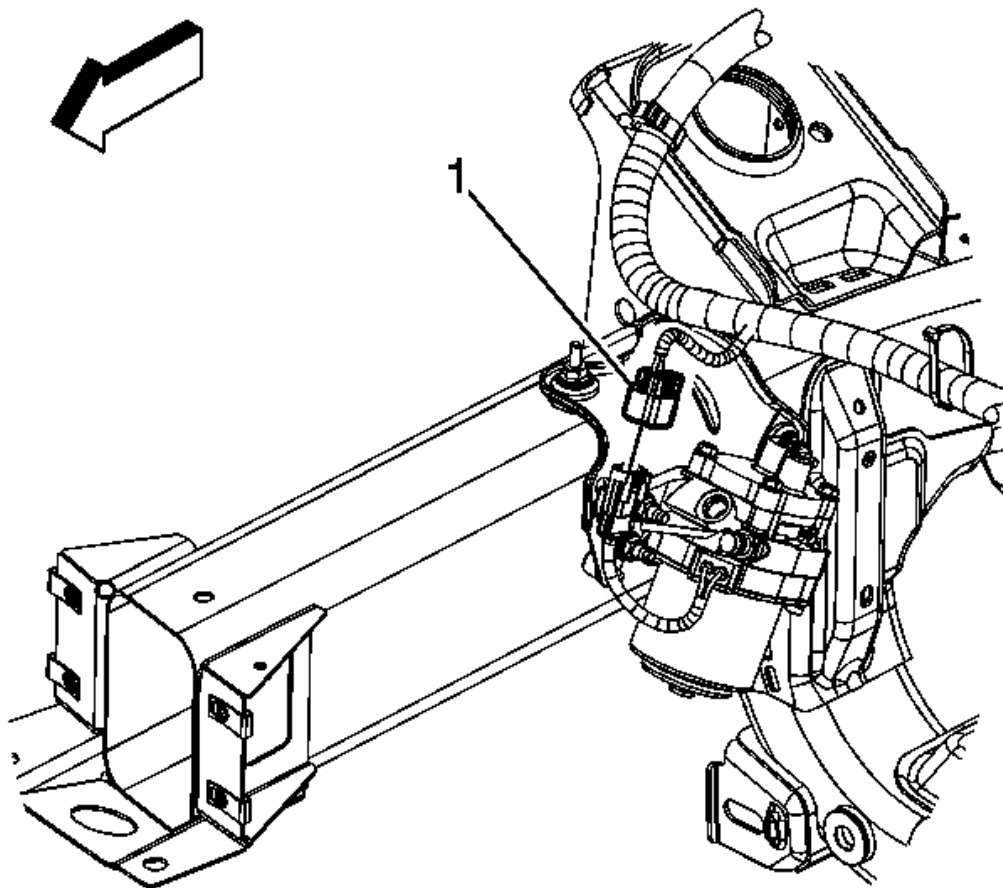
Locating Transmission Oil Cooler Pump Electrical Connector
